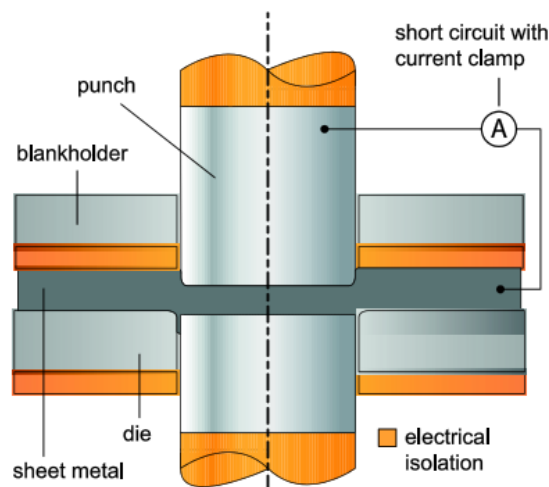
Tool set for thermoelectric measurement in blanking [TRÖ16]
